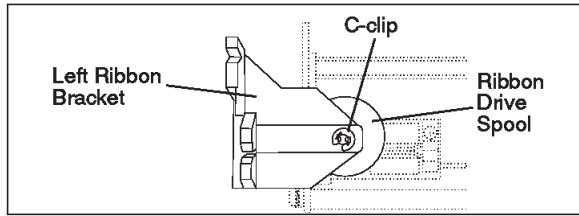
Ribbon Drive Spool Retaining Clip. (Viewed From Top)
